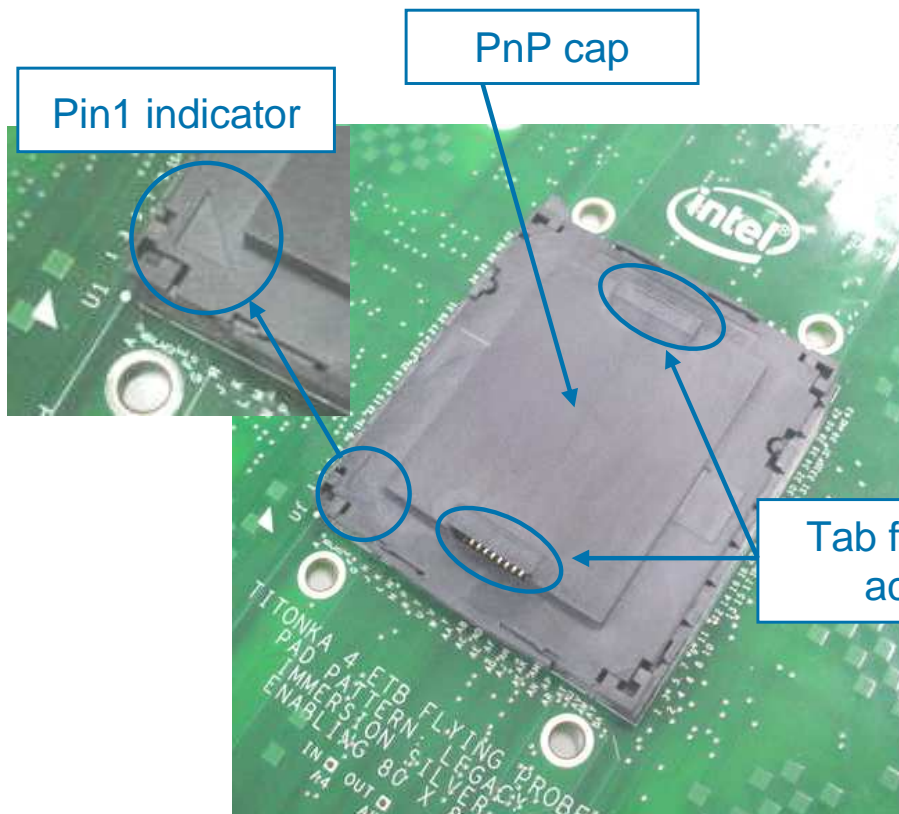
LGA1366 / LGA1356 socket with PnP cap on PCB
